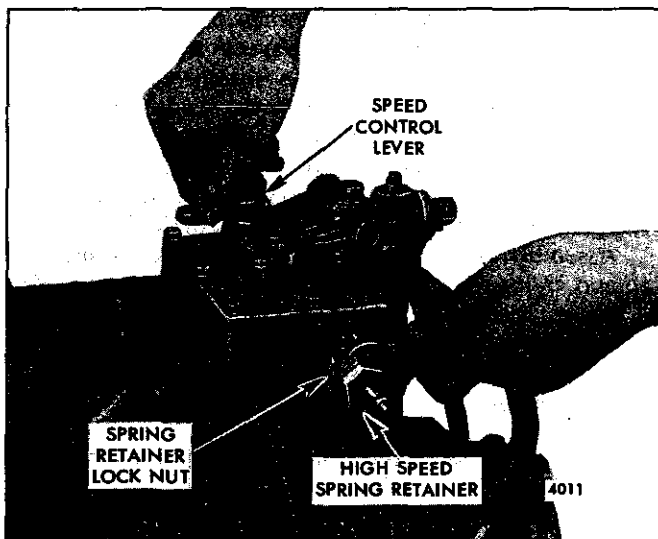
Adjusting Maximum No-Load Engine Speed
